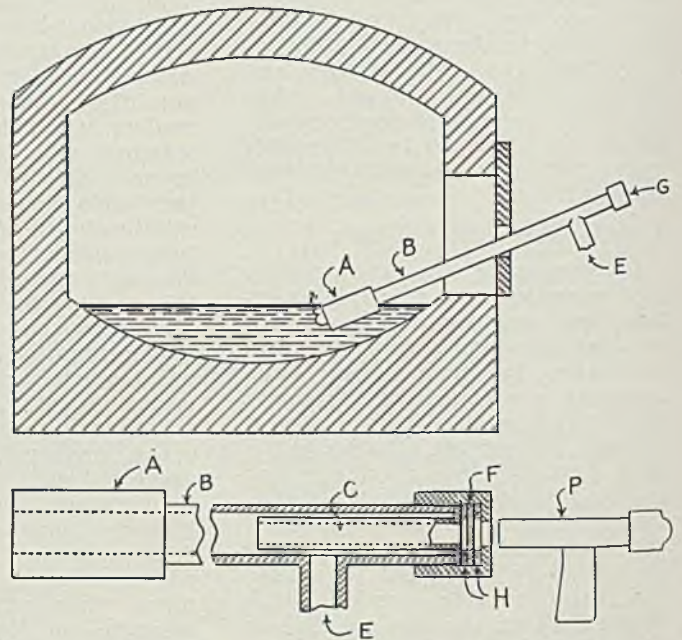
First Collins-Oseland tube, as used at Pencoyd. A is welded steel tip; B, pipe; C, inner pipe to protect window; E, connection to air supply; F, glass window; G, air-tight cap; H, asbestos gaskets; P, optical pyrometer
